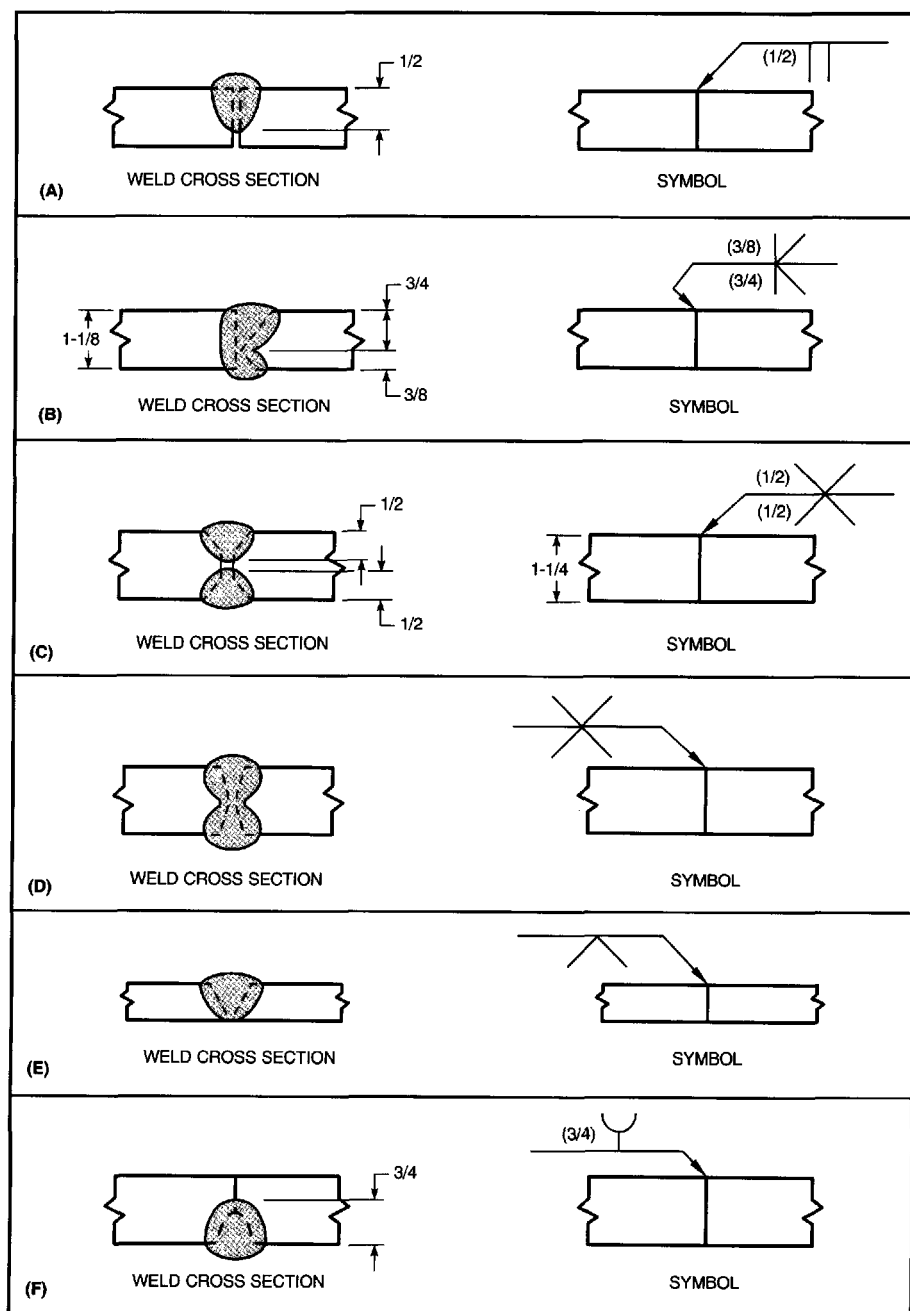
Examples of Typical Groove Welds Showing the Corresponding Symbols and Dimensions
